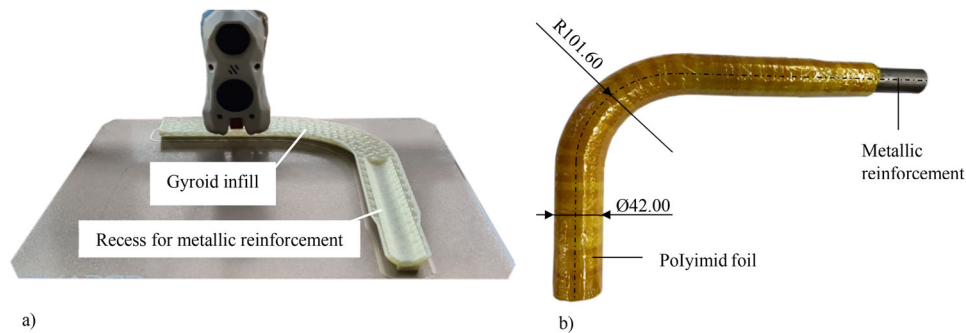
Additive manufacturing process of the mandrel (a); Braiding mandrel (b).
